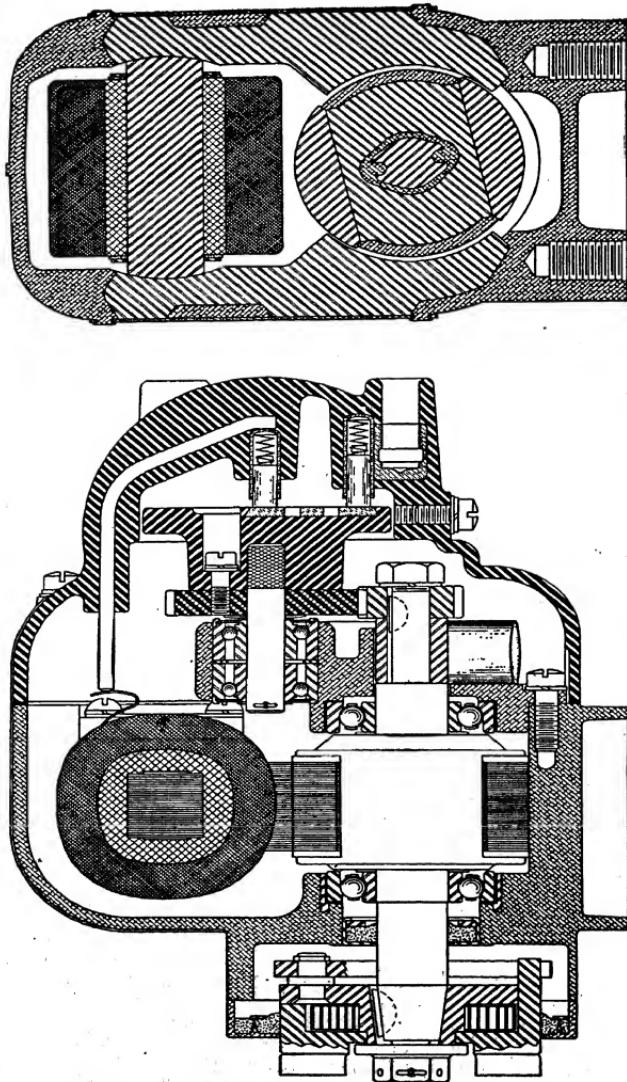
Sectional view of Eisemann AM-4 horizontal flange magneto with ball bearing distributor.
